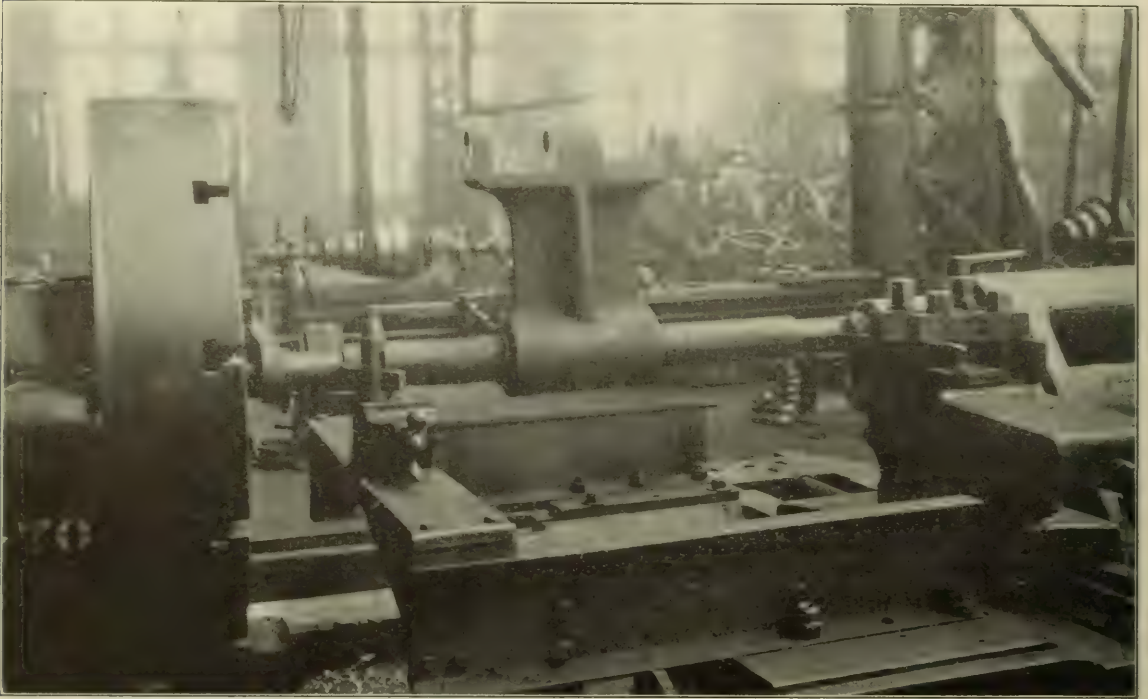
Pond Lathe Fitted for Truing Bearings on Reverse Shaft.
